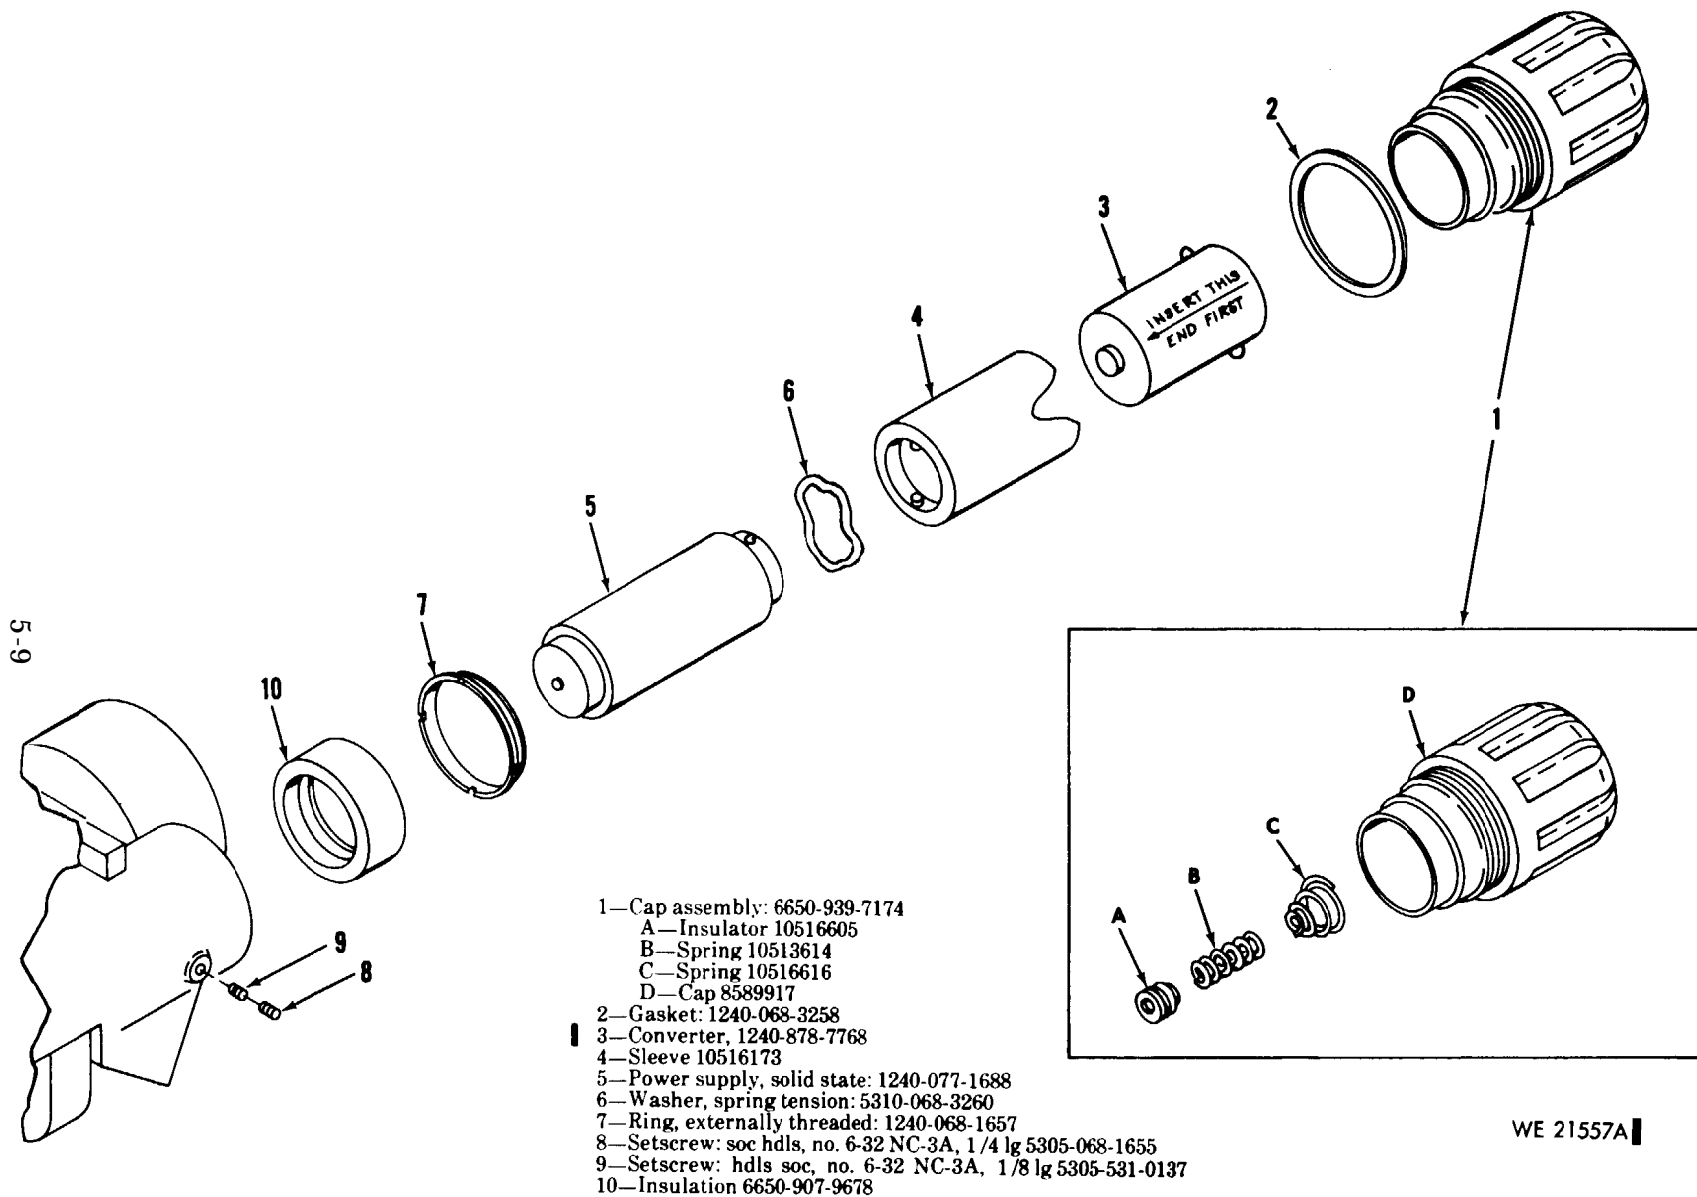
Solid state power supply 1240-077-1688 and related parts—exploded view.
